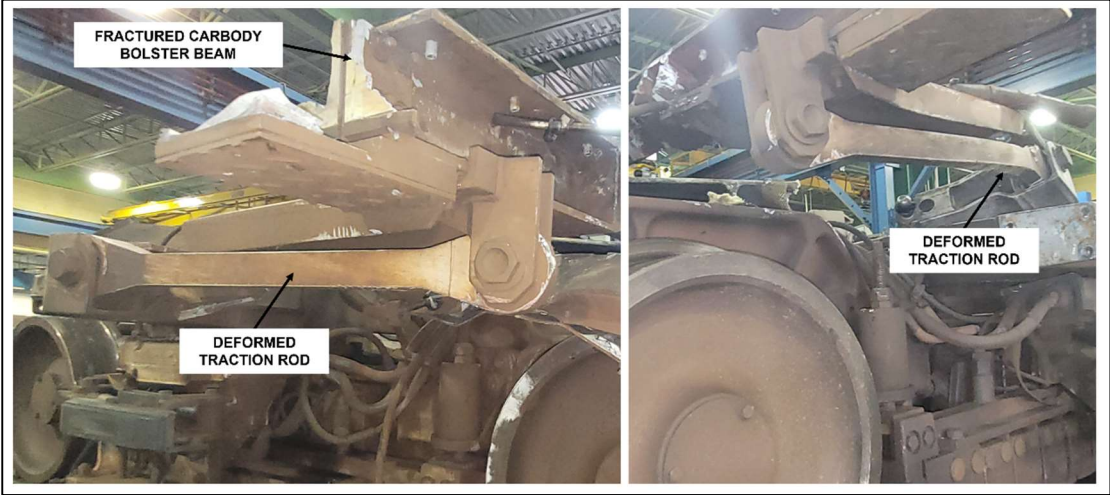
Fractured Carbody Bolster Beam and Deformed Traction Rod
